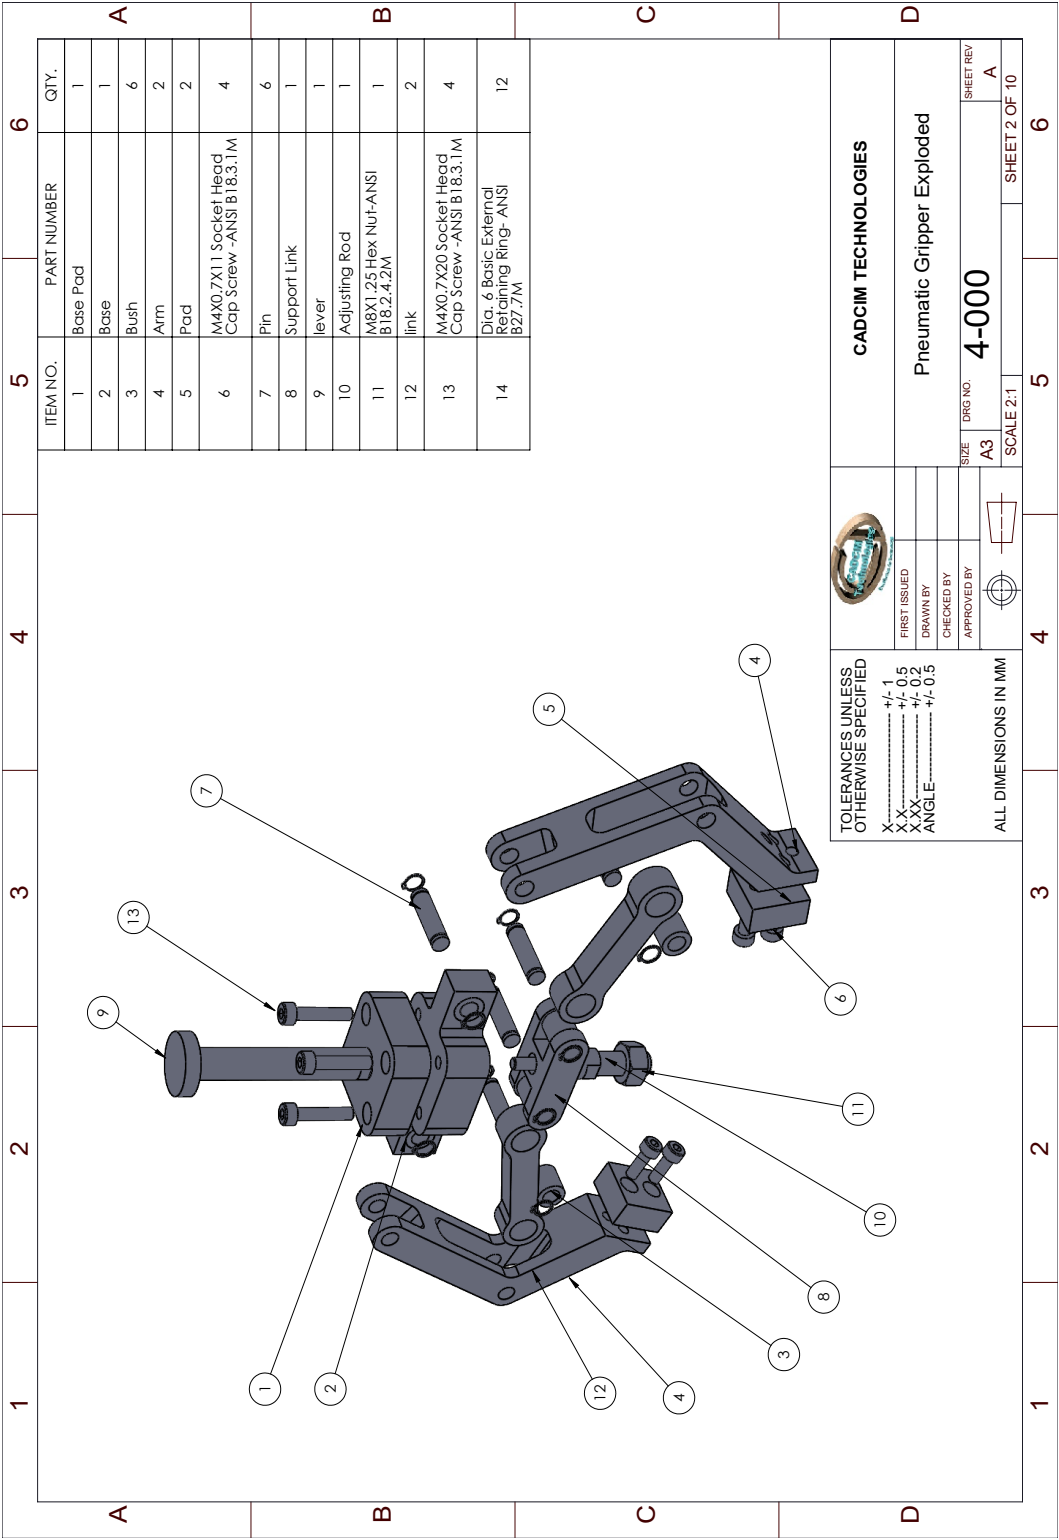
The exploded view of Pneumatic Gripper assembly
